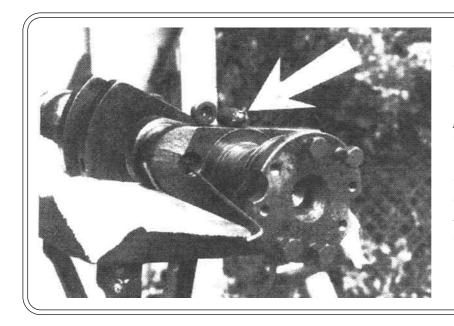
Resting on this 2½ litre crankshaft is a big end blanking plug. Next to it is a slug which has been removed from a big end oil way. The slug of sludge remaining in No.4 oil way is thick enough to support a long welding rod.
